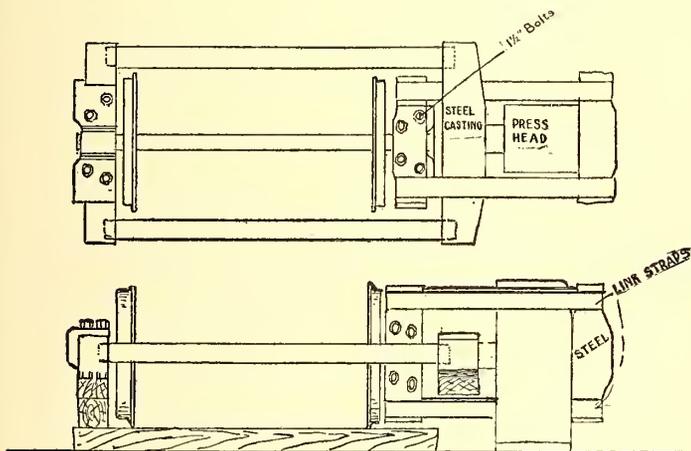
ARRANGEMENT OF WHEEL COMPRESSOR FOR TESTING AXLES
